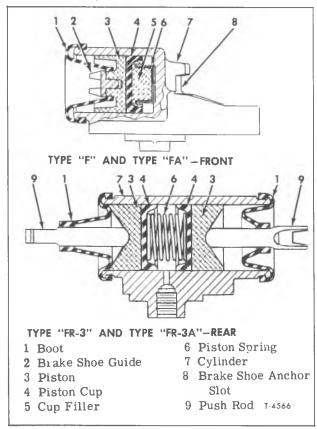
Wheel Cylinders Used with Type "F," "FA," "FR-3", and "FR-3A" Brakes
